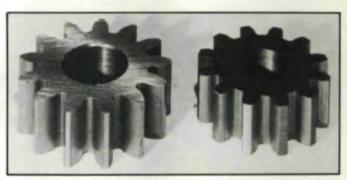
Gear-Shaped 5-DP, 20°-PA, 13-tooth gear, left, produced by a 20-tooth, 41/2-in. OD shaper cutter; compared wth a 5/7-DP, 20°-PA, 12-tooth gear, right, produced by a 15-tooth, 3.325-in. OD cutter.
